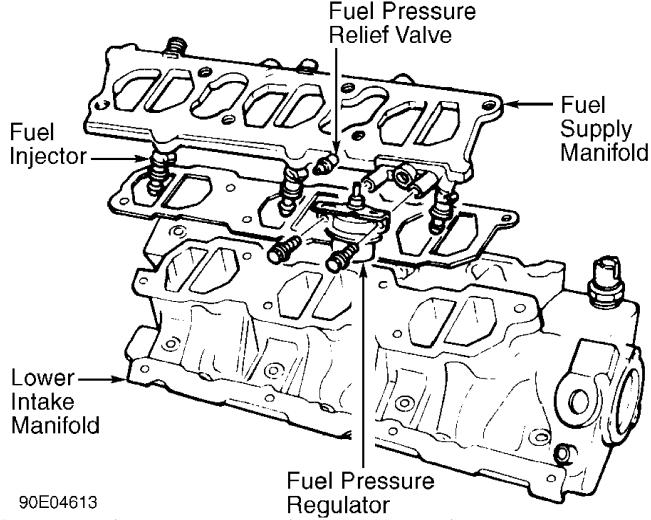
Exploded View of Fuel Supply Manifold Assembly (Navajo) Courtesy of Ford Motor Co.
